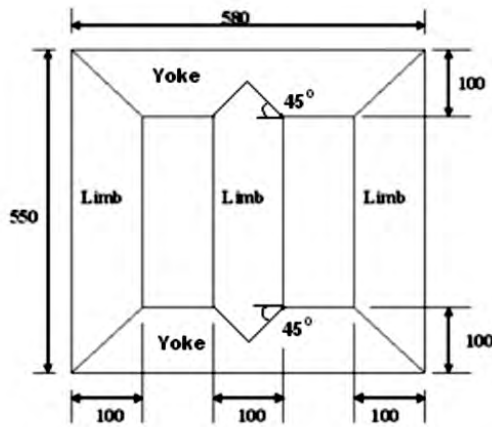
Dimension (mm) of 45° T-joint 100kVA transformer model
